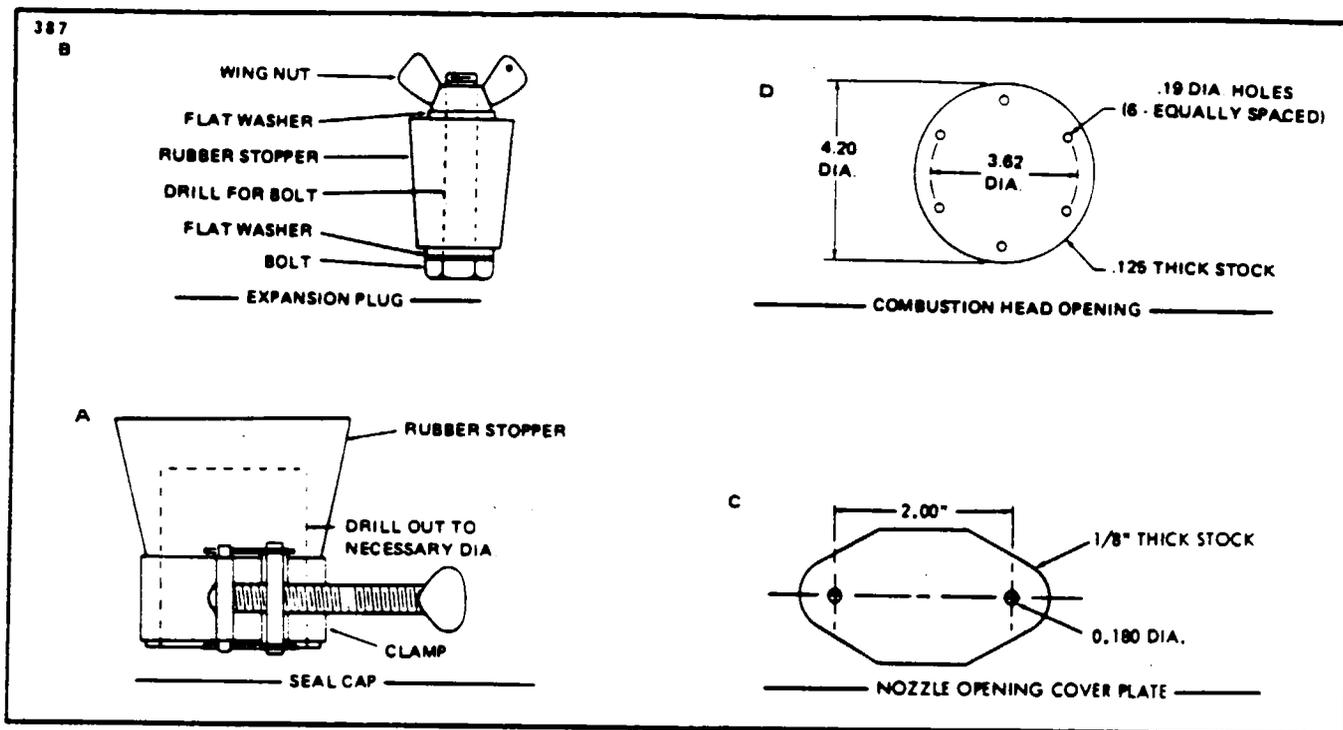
Suggested Design for Seal Plate, Plugs and Caps for Combustion Tube Leakage Test (Janitrol Heater)
